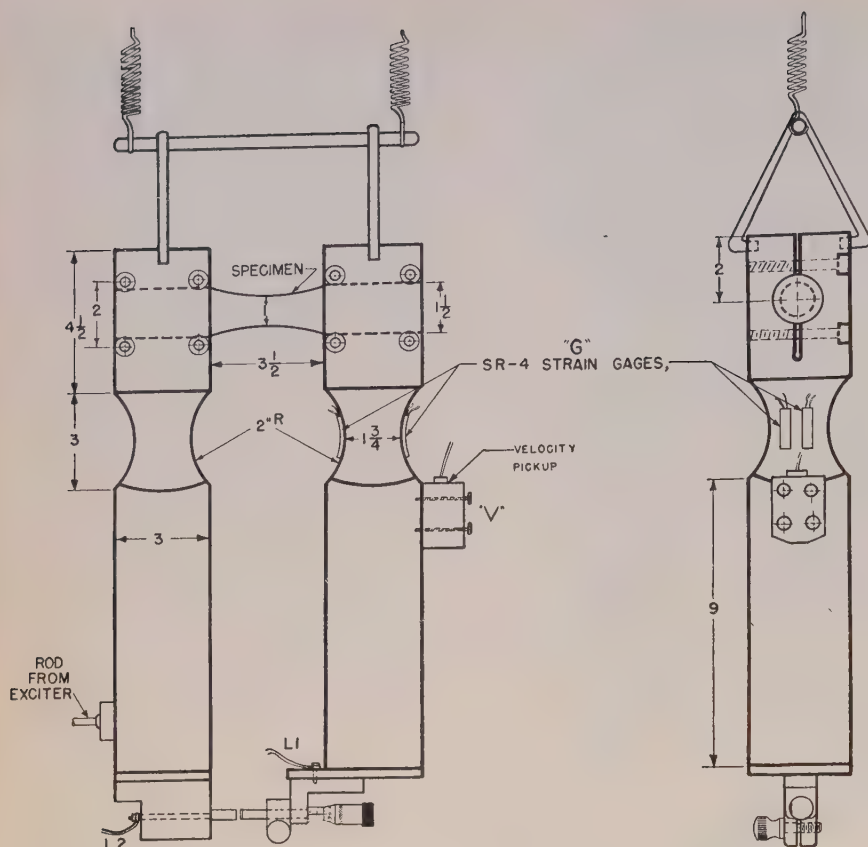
Assembly of Principal Mechanical Components of the Machine.
